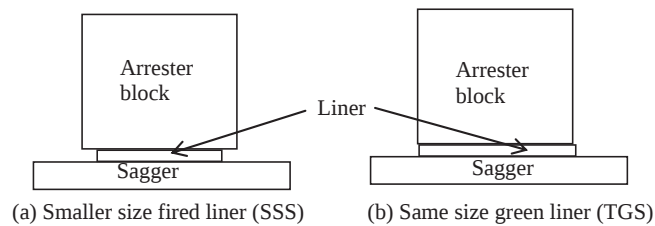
Circular disc liner intended to improve the bottom edge (modified).
